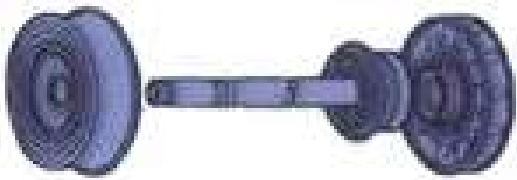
Exploded view of the core major module of the CFM56-7 engines <sup>[26]</sup>
